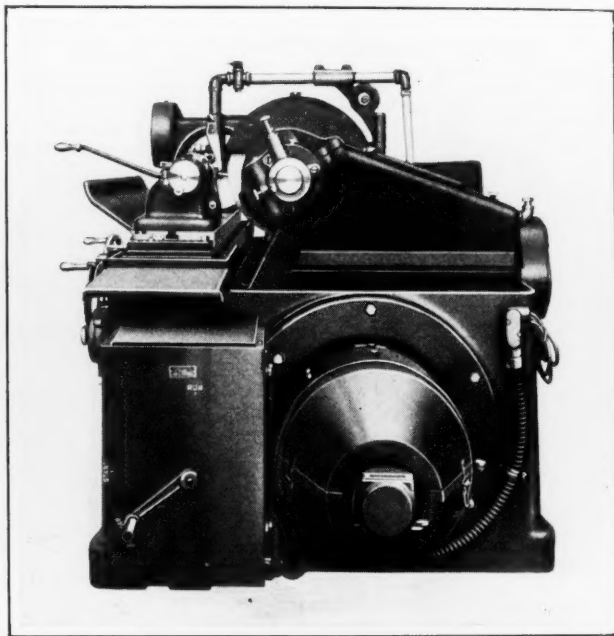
Right-hand End of Machine, showing Main Drive Motor mounted in Base
